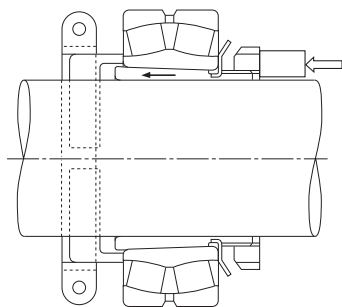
Removal of Adapter with Stop and Axial Pressure
